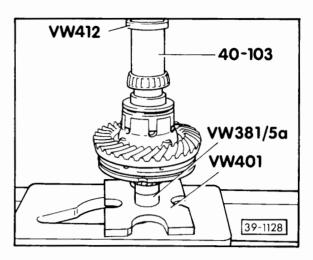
Heat inner race of tapered roller bearing to about 100° C, install and press home
